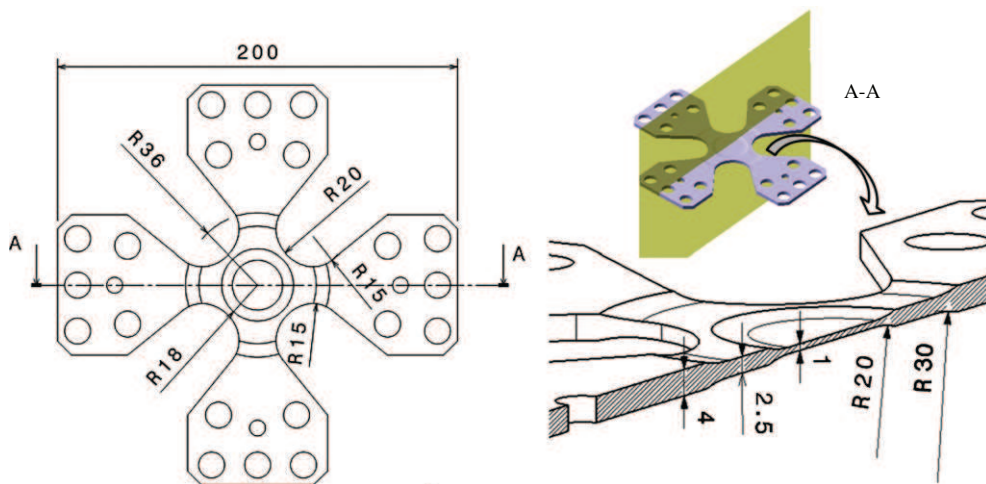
Designed cruciform tensile specimen with dimensions (mm).
